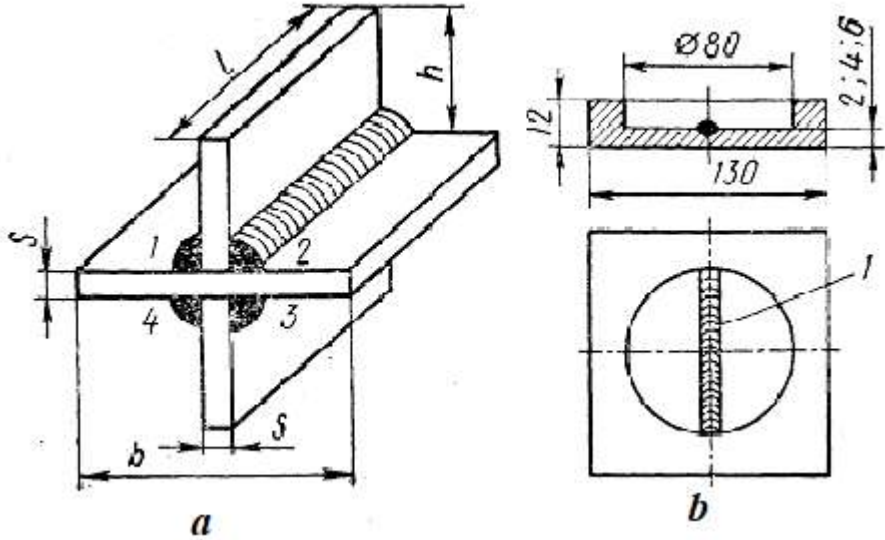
Technological tests for determining the resistance of welded joints to the formation of cold cracks:
